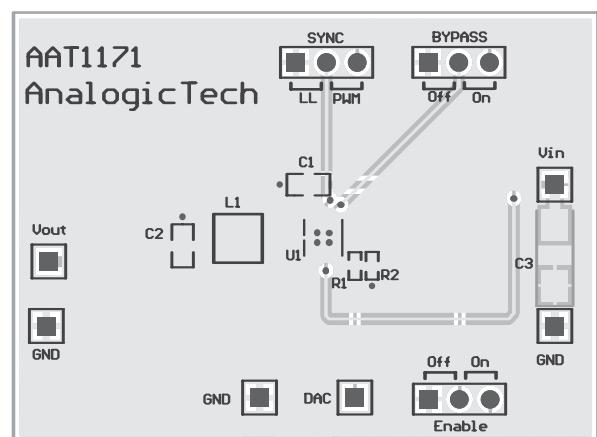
AAT1171 Evaluation Board Bottom Side Layout.
